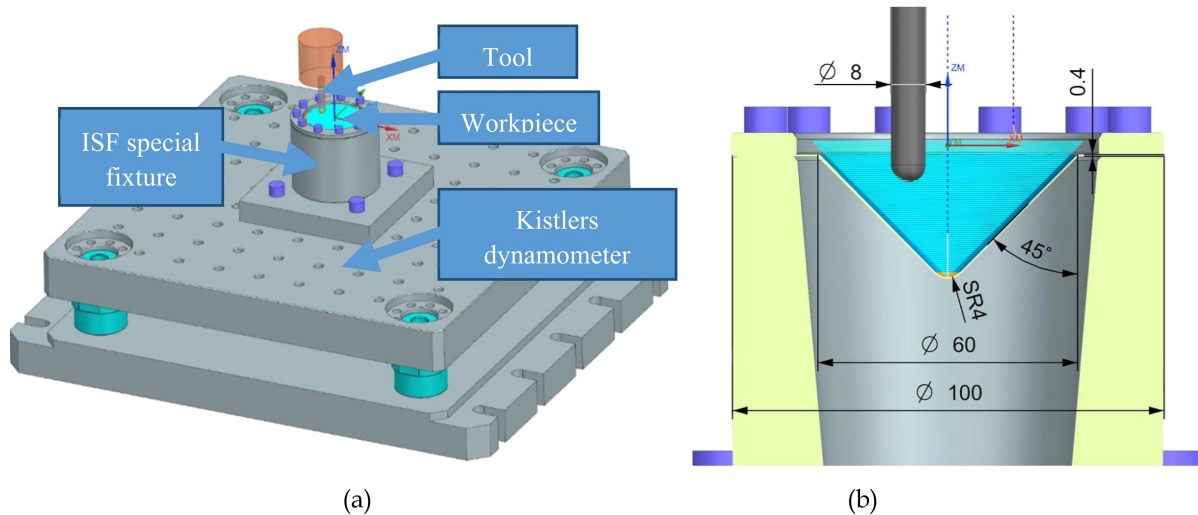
a) Test stand dedicated to measuring force during the incremental forming process, b) CNC path with drawpiece dimensions (in mm).
